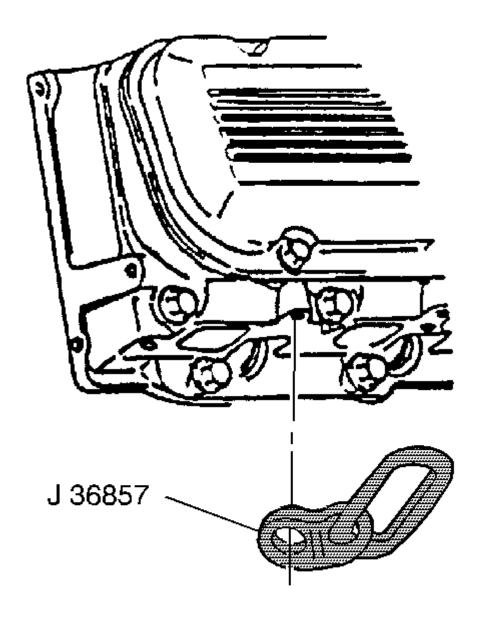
View Of J 36857 At Right Cylinder Head Courtesy of GENERAL MOTORS CORP.
